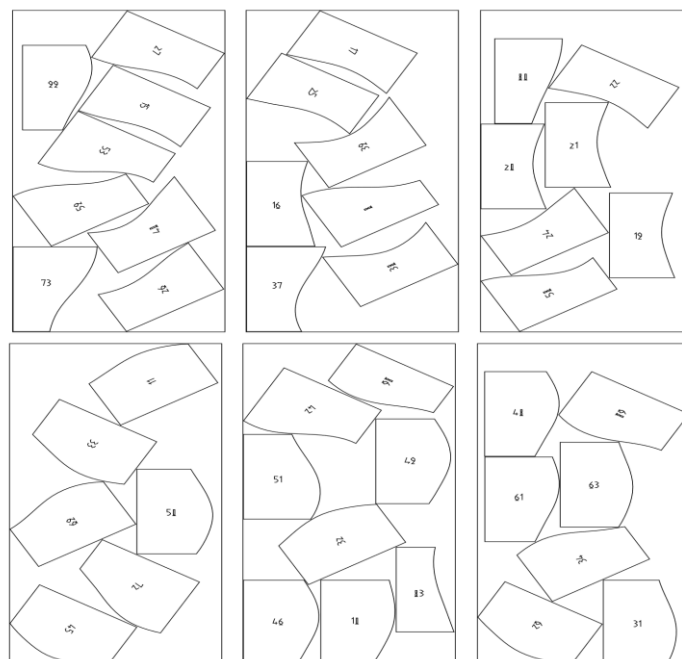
fabrication drawings of short panels on the plywood size of 8'×4'
